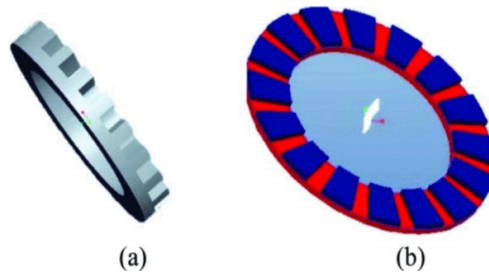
(a) Squirrel cage rotor, (b) Surface mounted PM rotor
